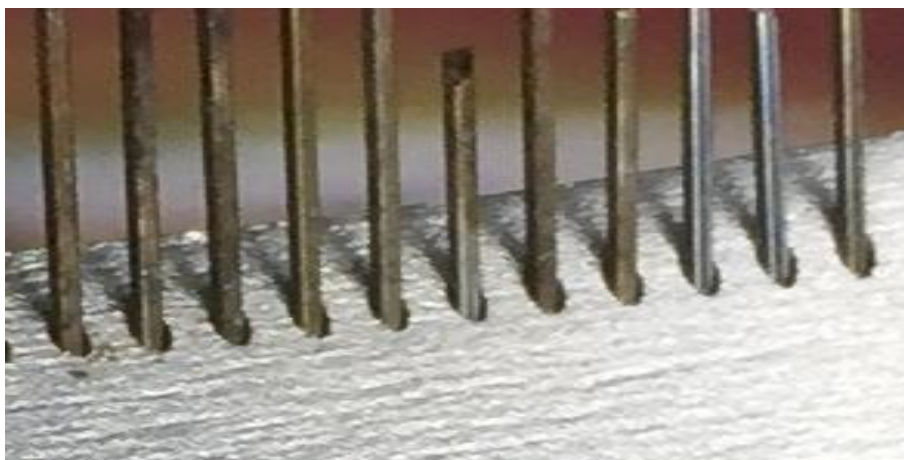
machined turbine blade specimen with calibrated jigs inserted into the cooling channels
